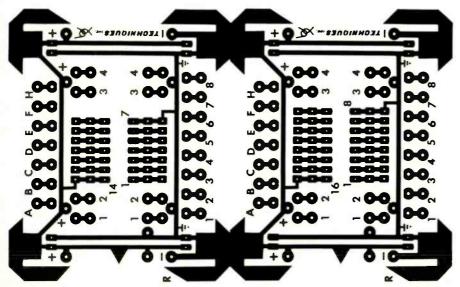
ALTERNATE-STYLE MODULES require 2-pin male and female bus connectors. Foil pattern is for component side of single-sided board and is shown full-size. Pattern delivers two modules which should be separated.
